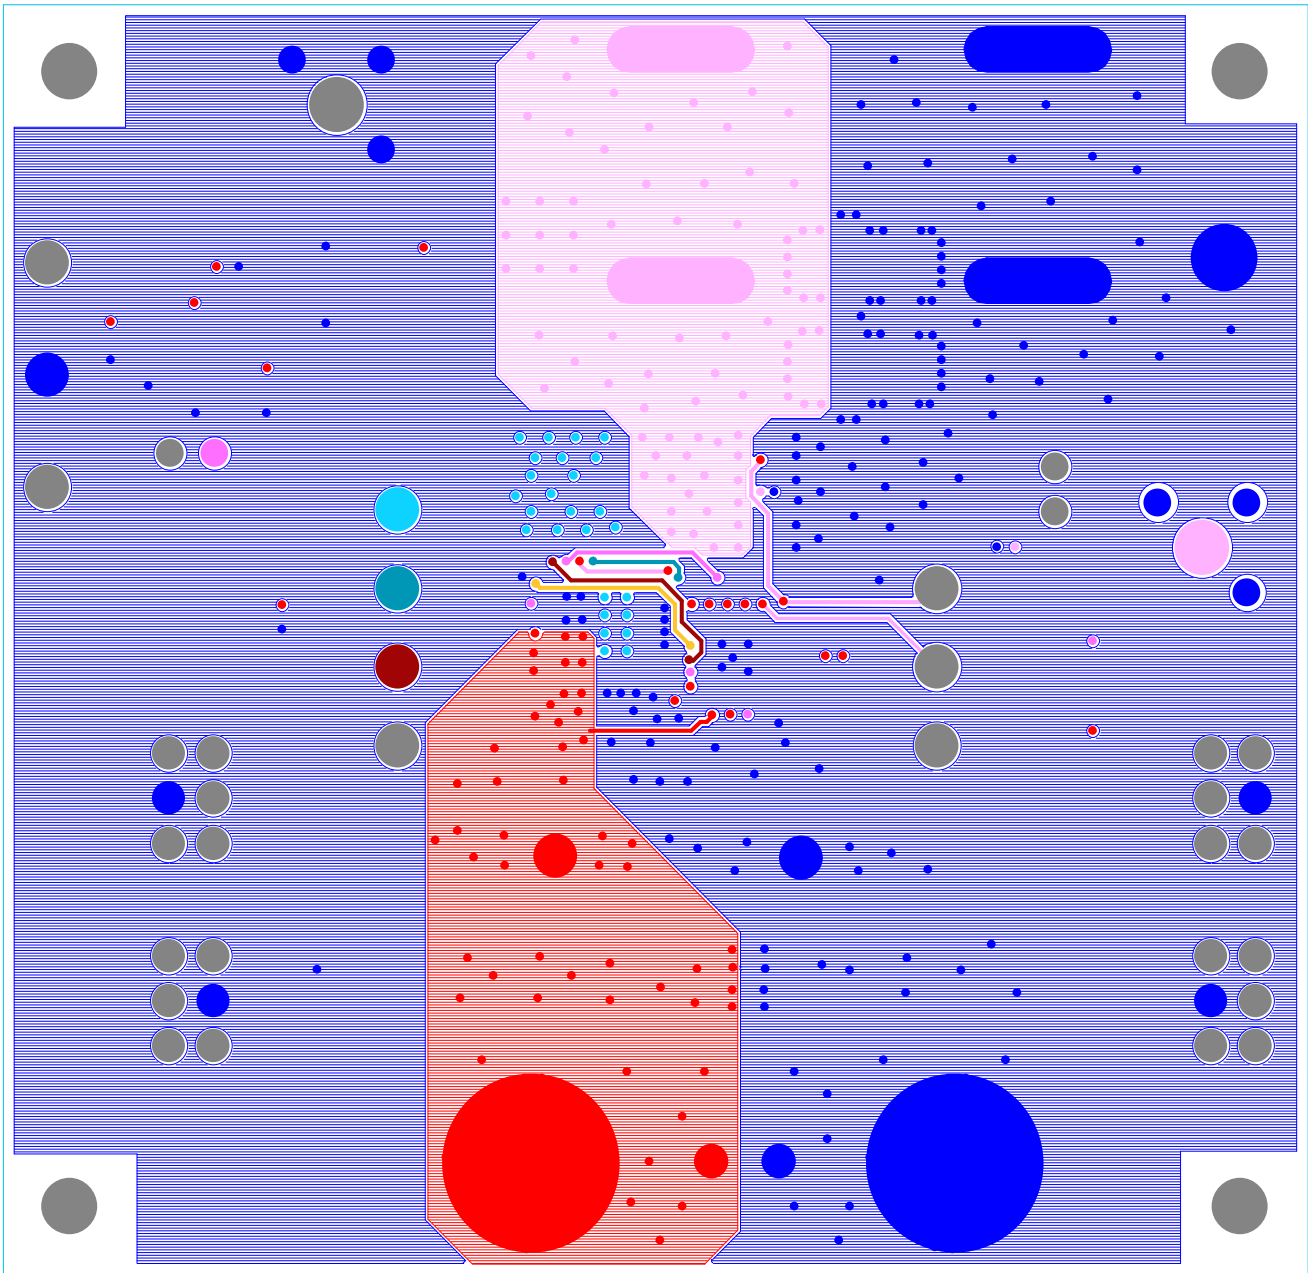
PCB - INNER LAYER 4 (TOP VIEW)
